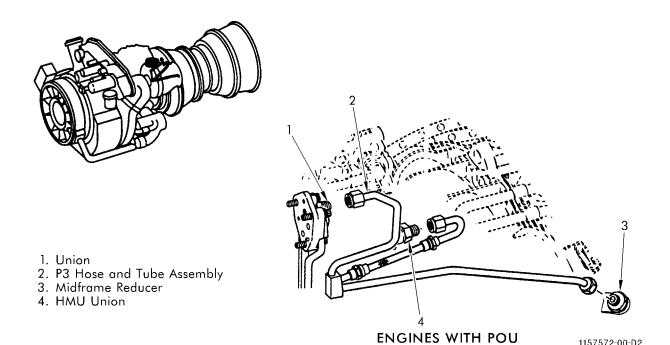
(T700) P3 Hose and Tube Assembly; Removal and Installation
